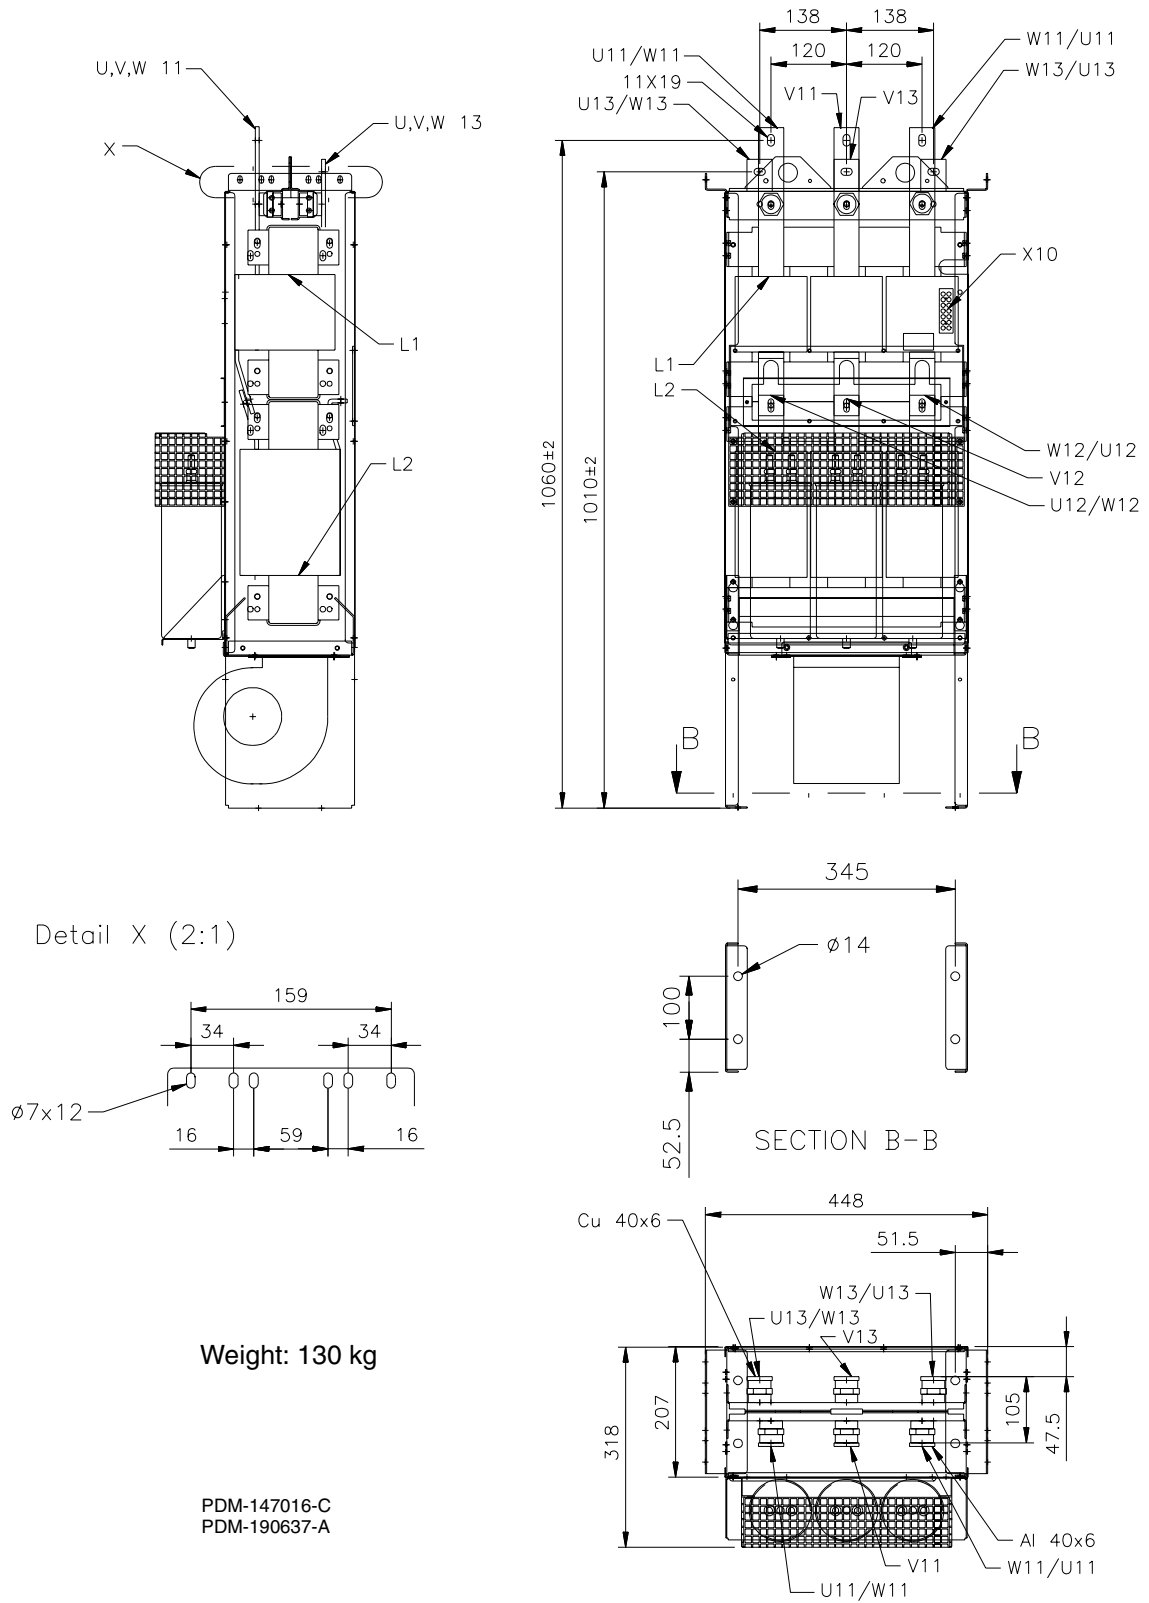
ISU_LCL_6R9 dimensions, fixing points and connectors.
